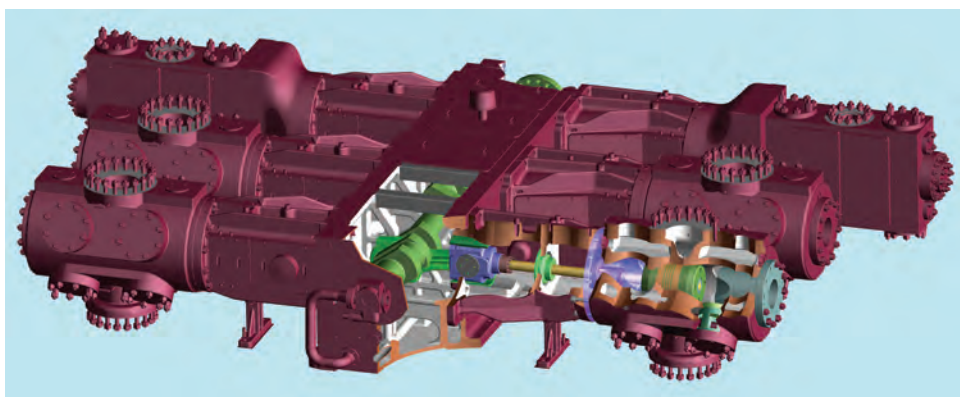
Frame of a separable reciprocating compressor (courtesy of Dresser-Rand).
